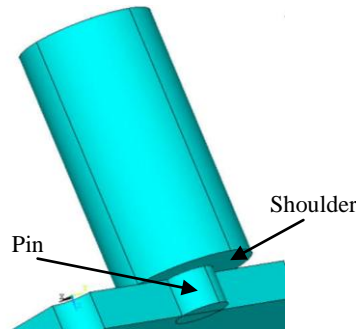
Three-dimensional model of the friction stir welding process.
